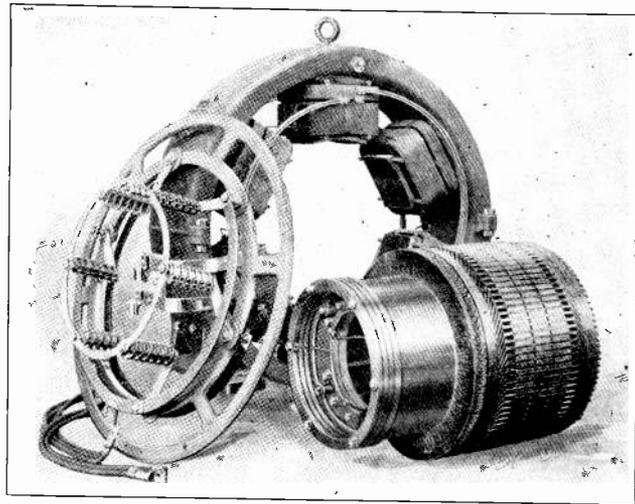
B. This view shows a three-wire generator disassembled. You will note the slip rings mounted on the end of the commutator.
